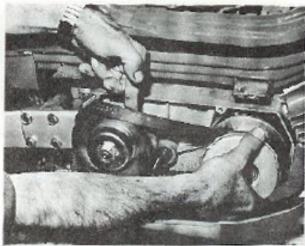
By rotating the front pulley to the rear of the motor, the V-belt will ride off the rear pulley.
